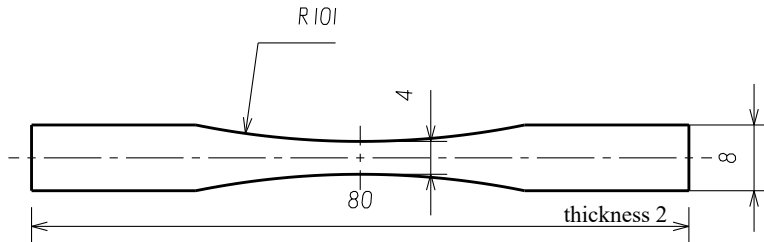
Dimension (mm) and geometry of fatigue specimens.
